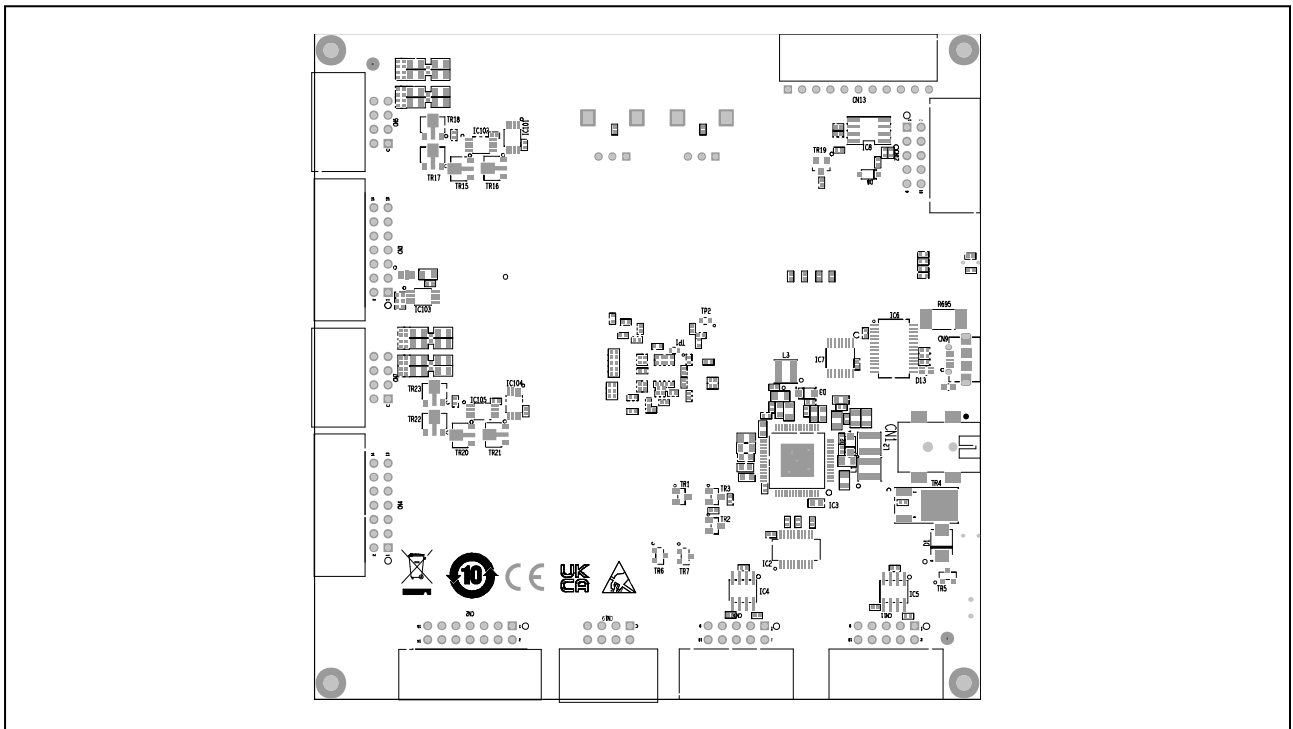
Starter kit board bottom view, board revision D017988\_06\_V02
